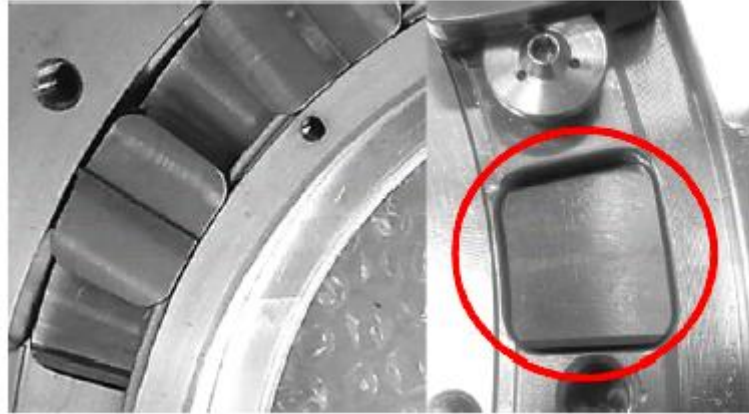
A detailed view on the levers fixed by means of grooves in the bearing body.
